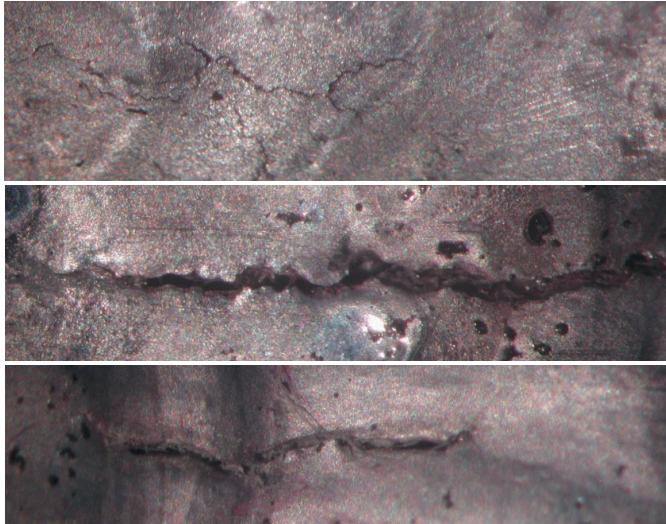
Demonstration cracks in aluminium alloy butt joints; magnification 28,5x
